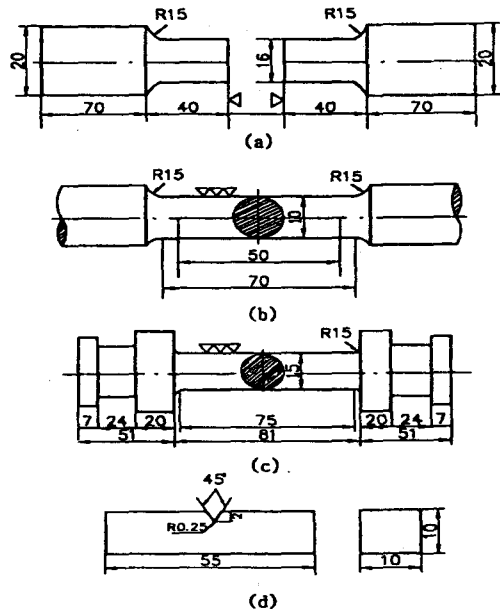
Shapes and dimensions of (a) friction welding, (b) tension, (c) torsion and (d) impact test specimen.
